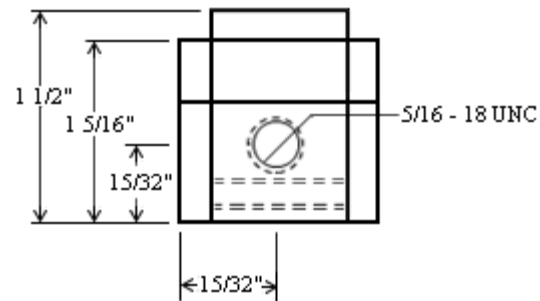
Back view Hook-SH5 (dimensions in inches).
